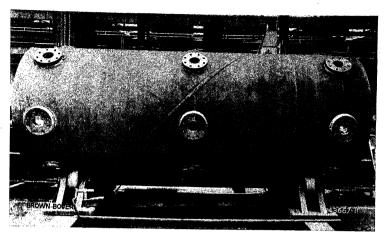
Welded mantle of a preheater, wall thickness 42 mm.
